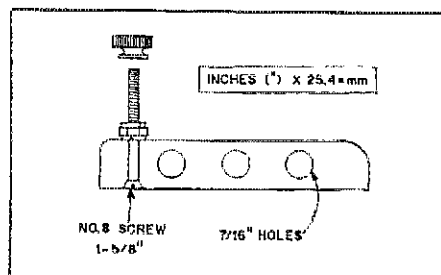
Drill three holes in the side of the block of wood as shown above.
